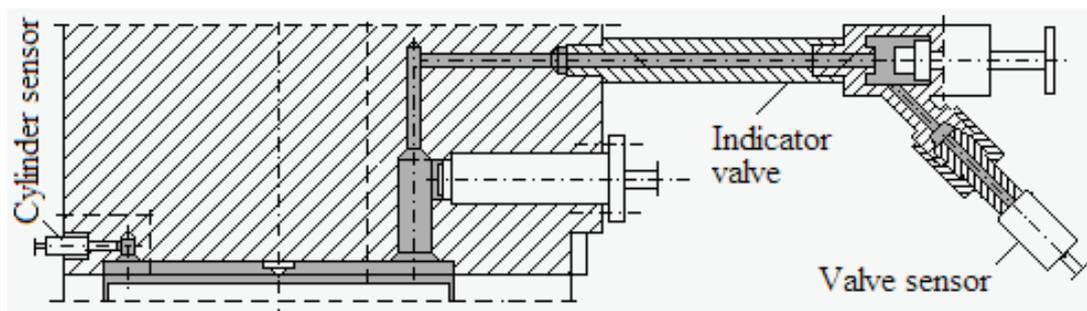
Gas channels of Sulzer AL20/24 engine - pressure sensors location during the test
